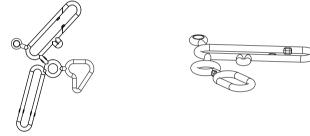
Cord seals of the pneumatic block; double-acting (left), single-acting (right)
